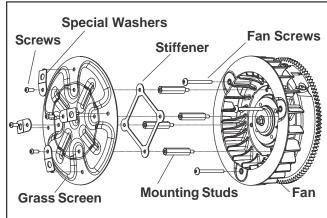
Cooling Fan and Grass Screen Assembly Details.
